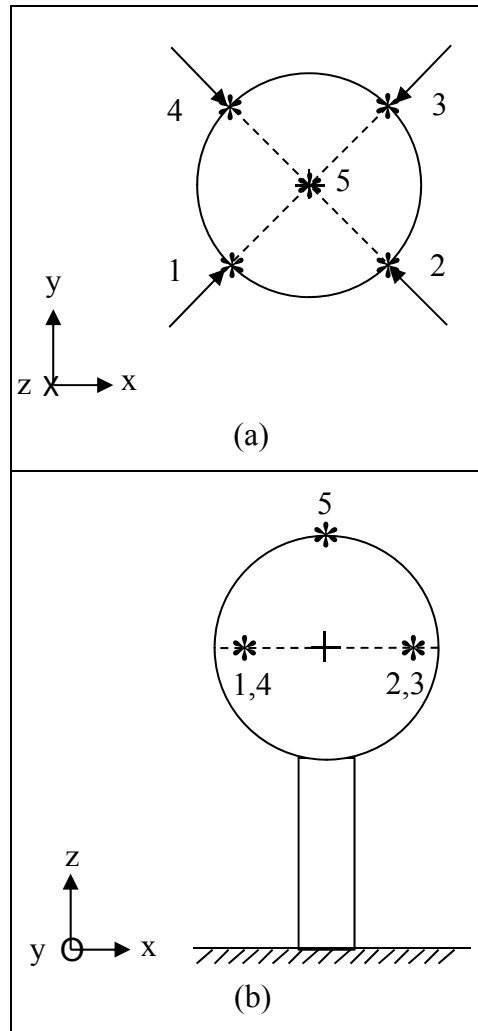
Target contact points and the machine  $x$ - $y$ - $z$  frame: (a) top view and (b) front view.
